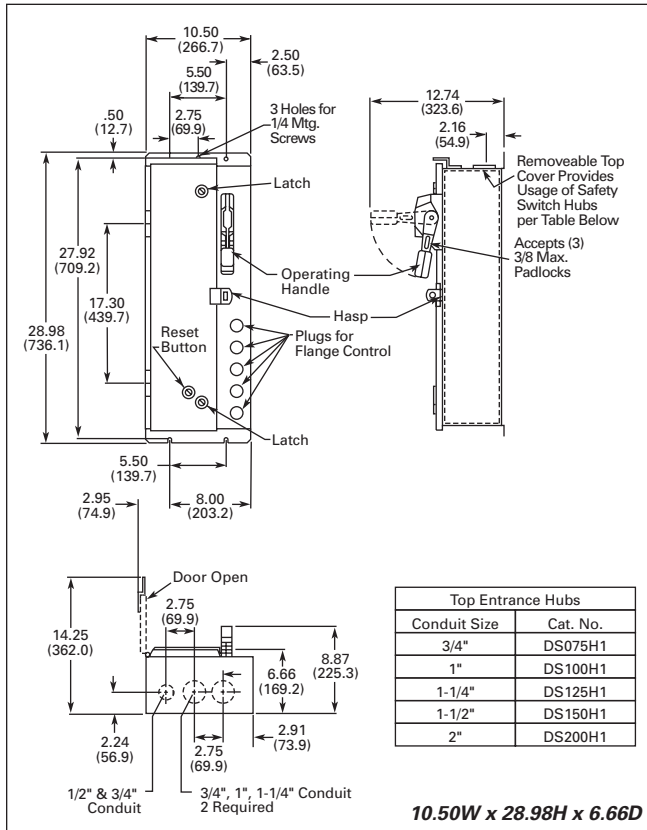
Box A, Type 3R — Approximate Dimensions in Inches (mm)
